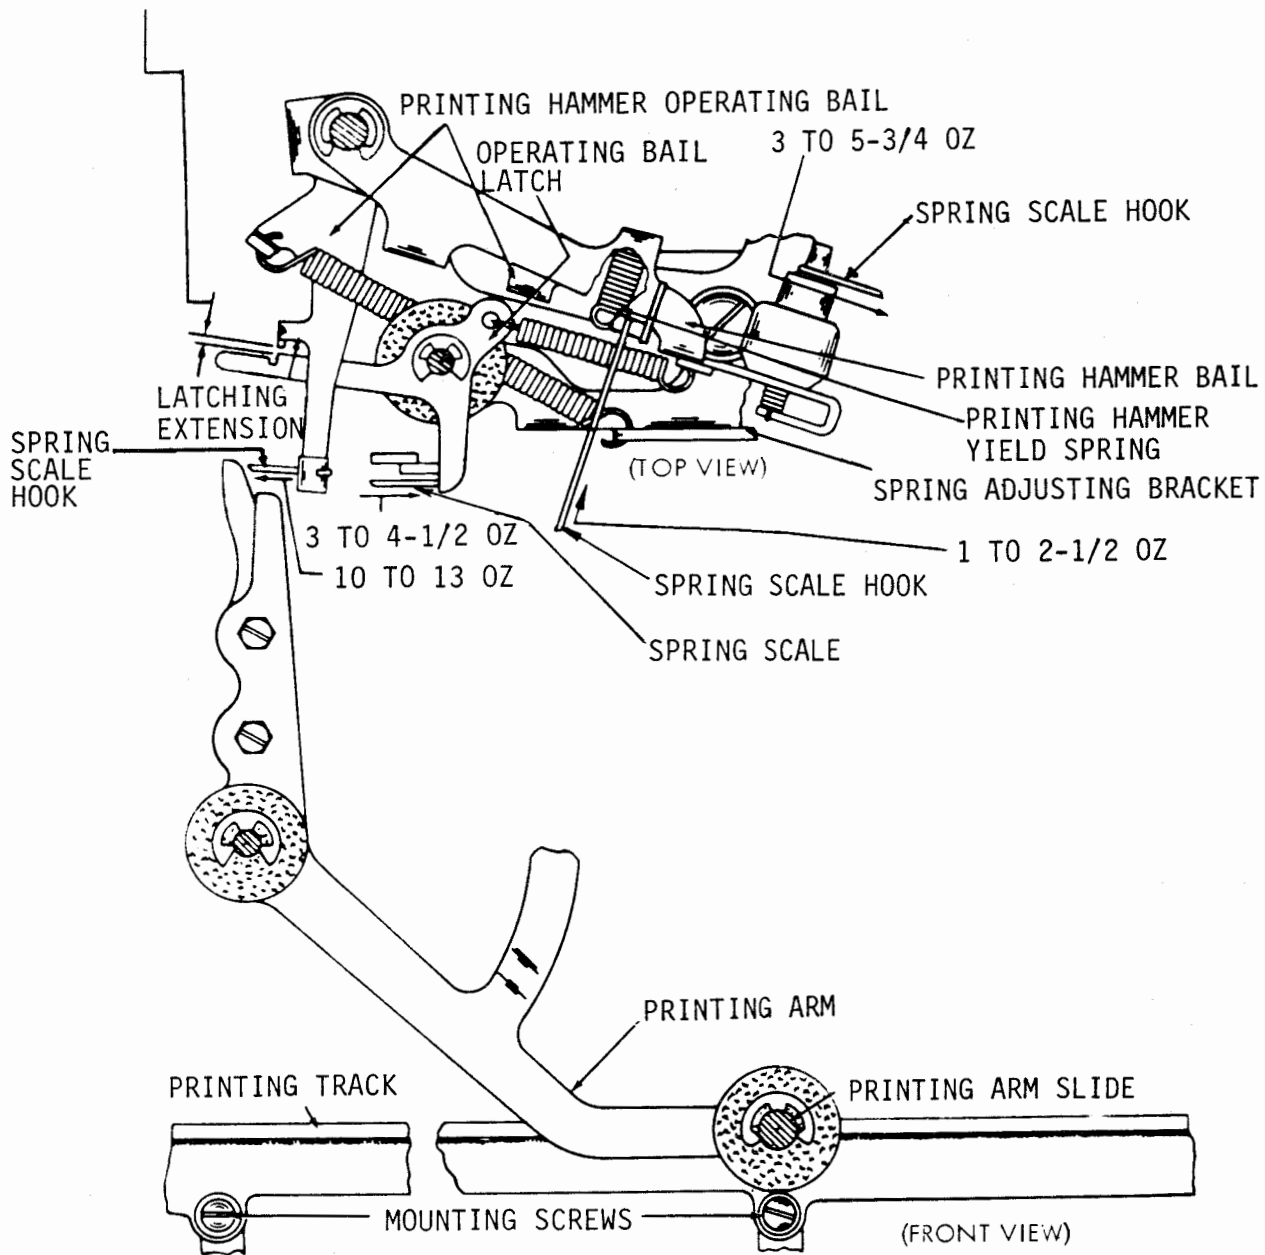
Printing Hammer Operating Bail Latch Spring, Printing Hammer Bail Spring, Printing Hammer Plunger Spring, Printing Hammer Yield Spring, and Printing Track
